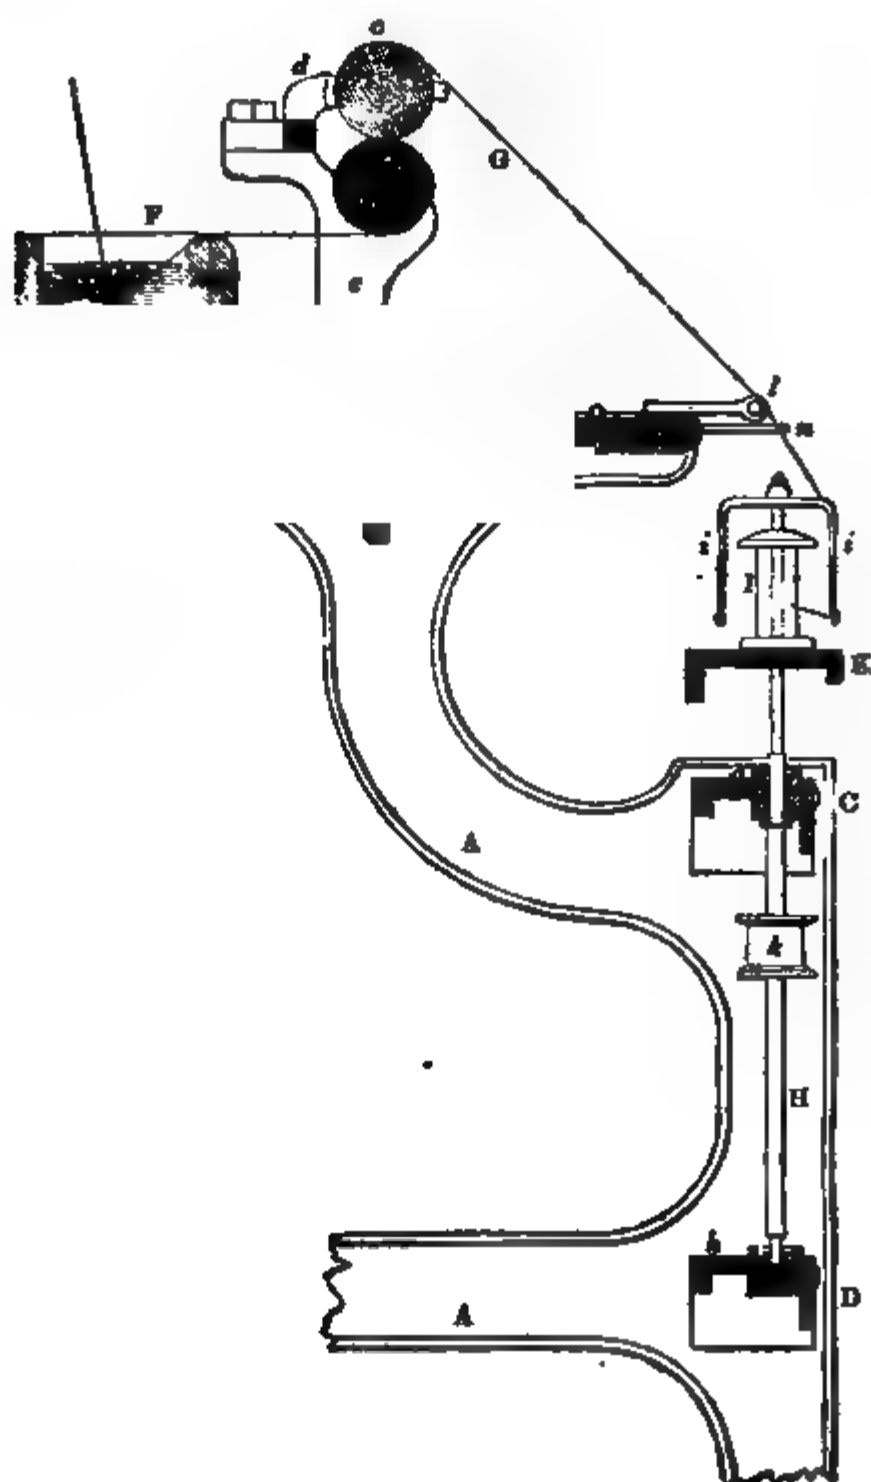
Doubling and Twisting Frame. Details of Spindle Mechanism.
